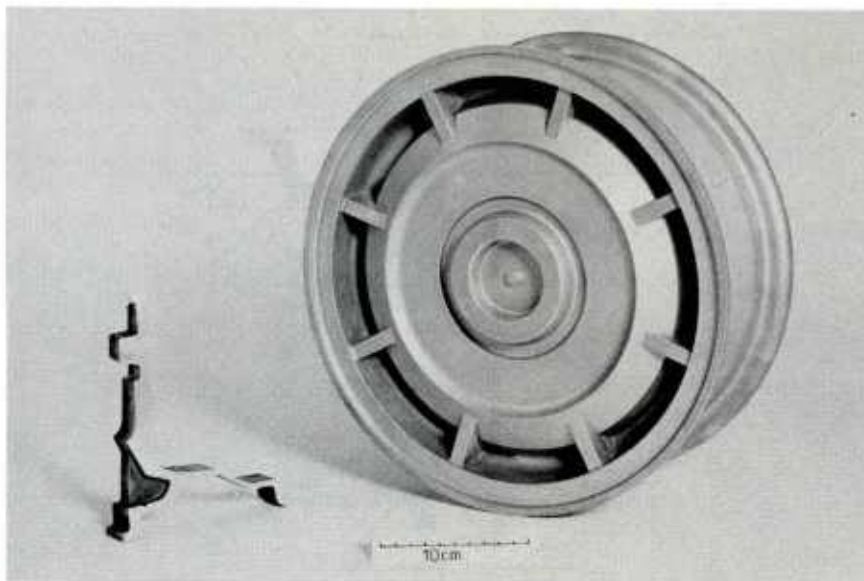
Prototype car wheel made by Squeeze Forming, to illustrate the undercut form capability. Note the complex cross-section, thickness ranging from 2.5 mm to 24 mm. Formed in LM25 alloy.
